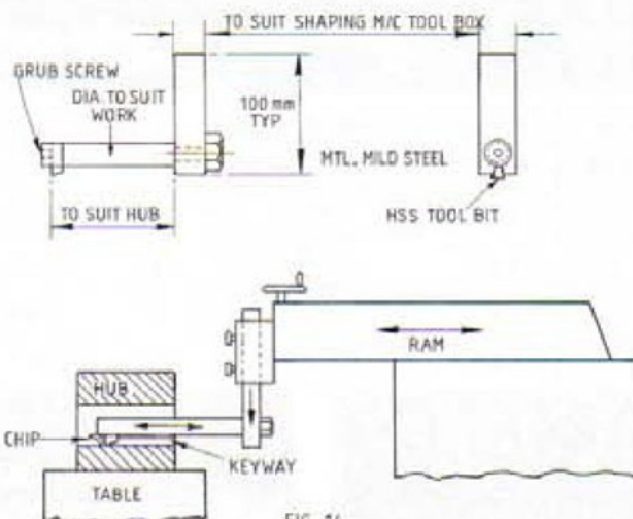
A SHAPER TOOL FOR HUB KEYWAYS
